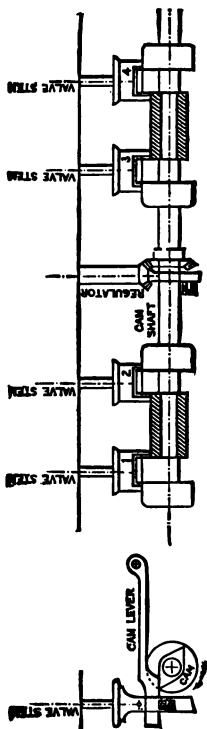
CAM SHAFT, PUTNAM ENGINE.
